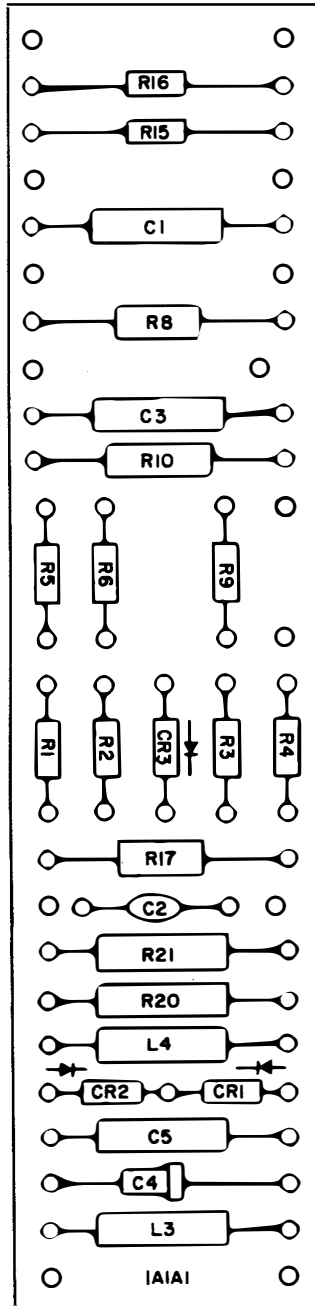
Oscillator-Power Supply, Printed Circuit Board 1A1A1
